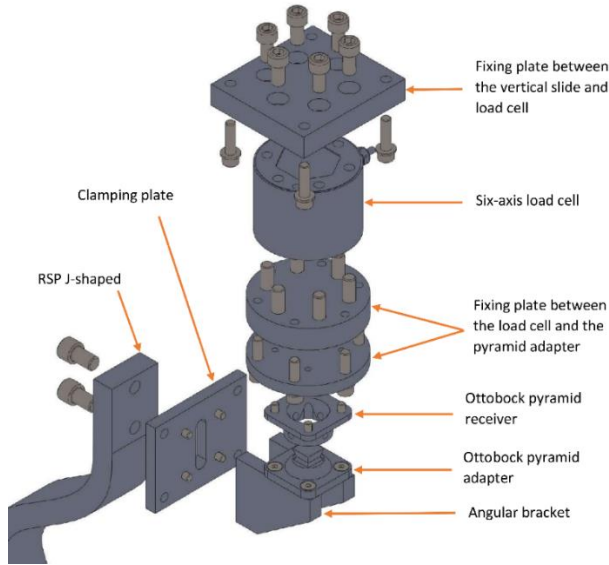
Exploded view of the attachment of the RSP to the load cell
